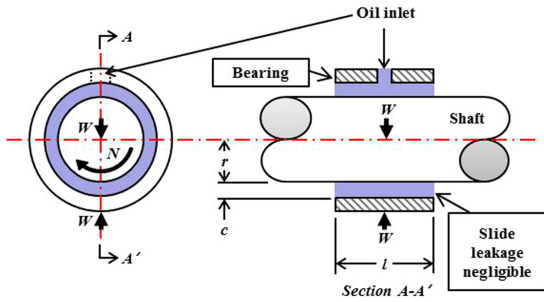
Petroff's lightly loaded journal bearing consisting of a shaft journal and a bearing with an axial-groove internal lubricant reservoir
